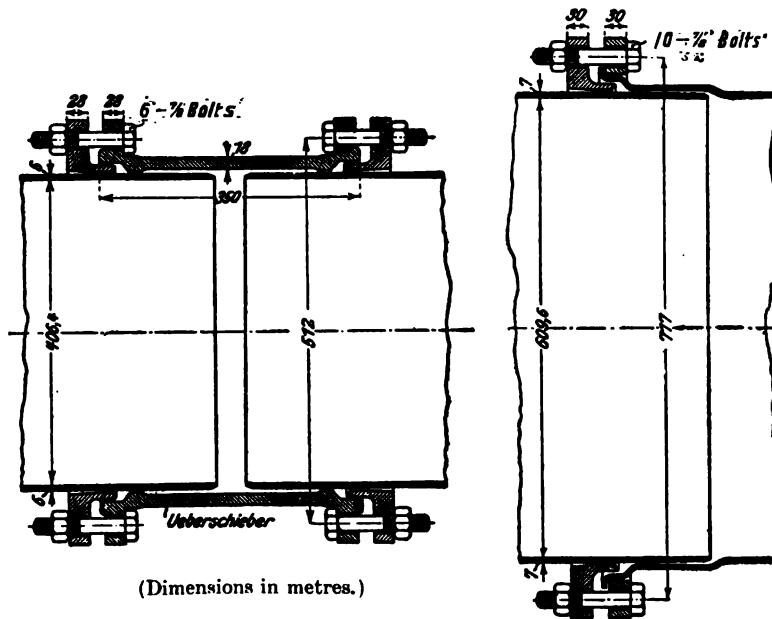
Compressed Air Pipe. On the right: Standard Pipe Joint; on the left: Sleeve for connecting Smooth Pipe Ends (the latter is used when pipes have to be interchanged).
